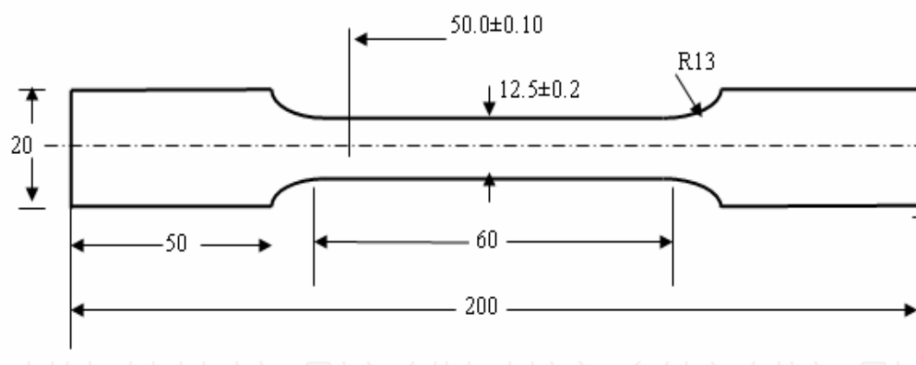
ASTM E646-98 Sheet Metal Specimen Dimension
